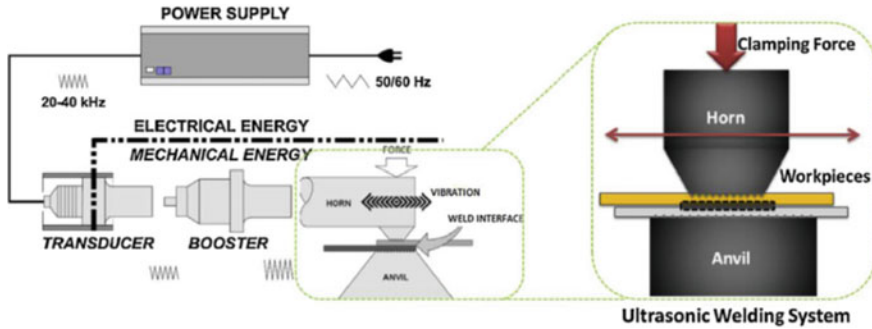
Ultrasonic metal welding [1]
